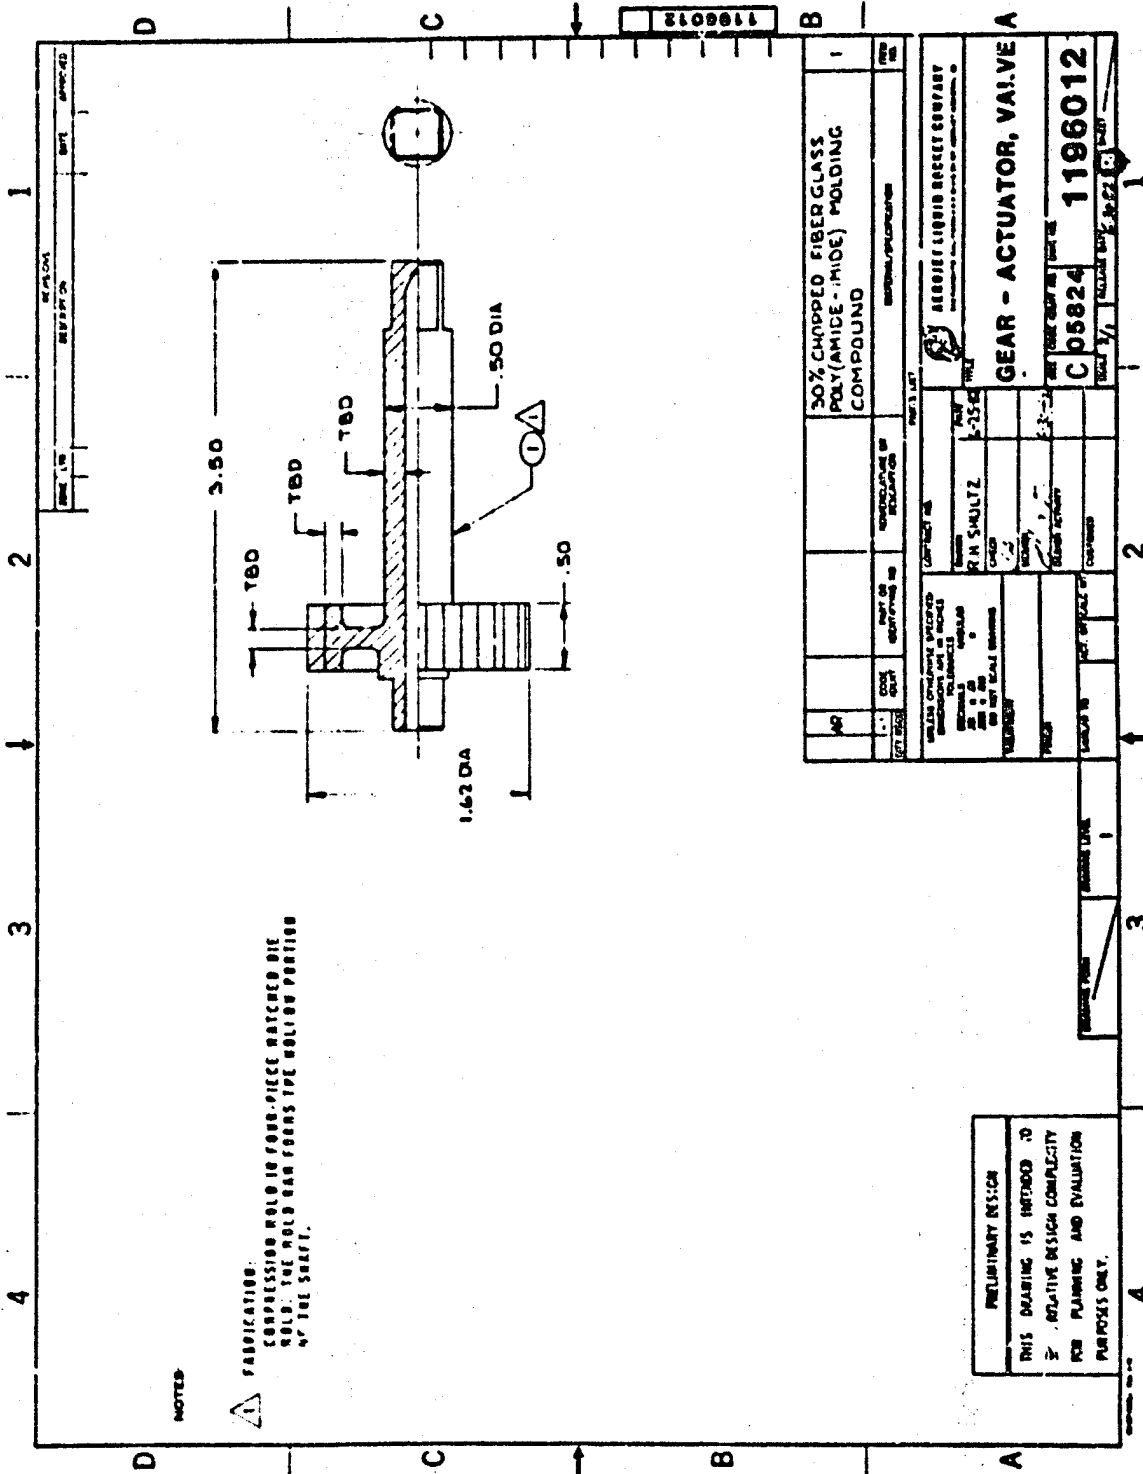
Gear - Actuator, Valve (ALRC Drawing No. 1196012)
